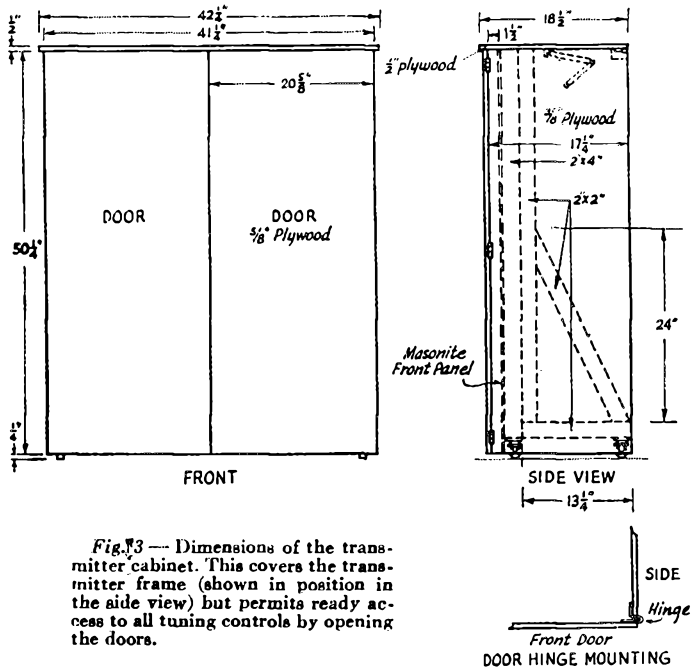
Dimensions of the transmitter cabinet. This covers the transmitter frame (shown in position in the side view) but permits ready access to all tuning controls by opening the doors.
